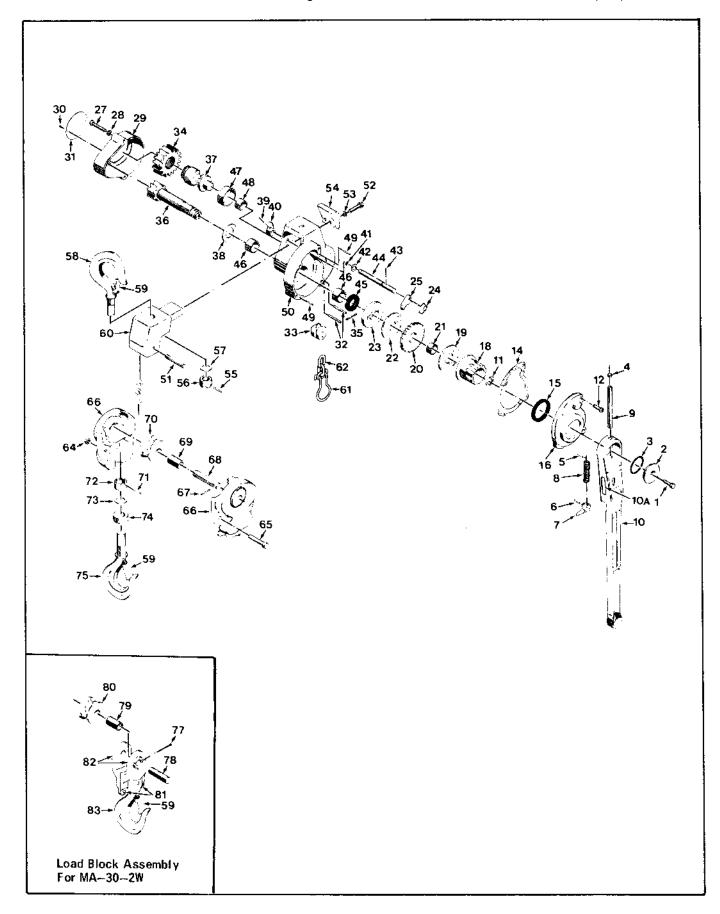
EXPLODED ILLUSTRATION OF MODEL MA-30-2 AND MA-30-2W HOISTS
